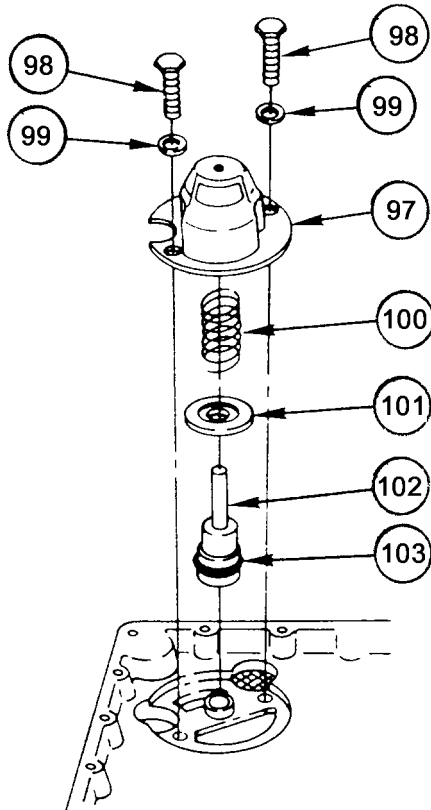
Equalizer Valve Components. Figure 38. Equalizer Valve Components.
